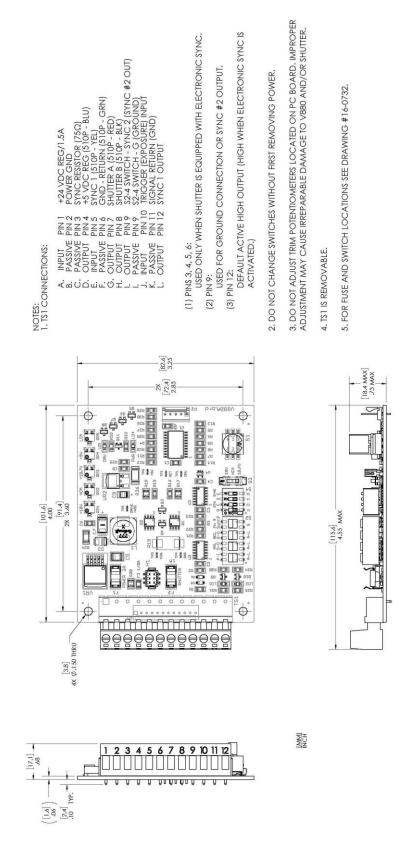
V880 Printed Circuit Board Outline and Connection Drawing
